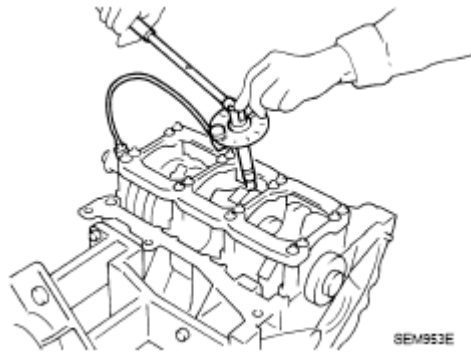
Measuring Connecting Rod Bolt Tightening Angle
